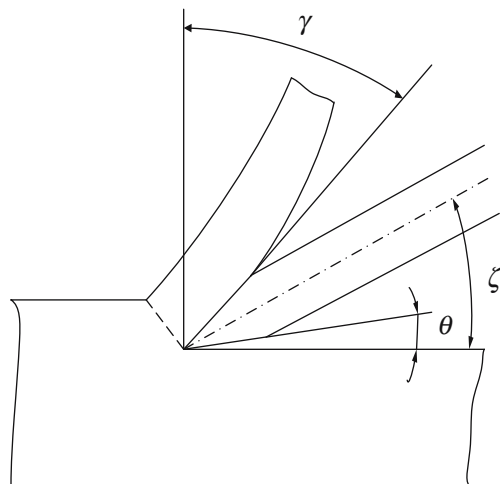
Tool angles:  $\zeta$ , setting angle;  $\gamma$ , rake angle;  $\theta$ , clearance angle
